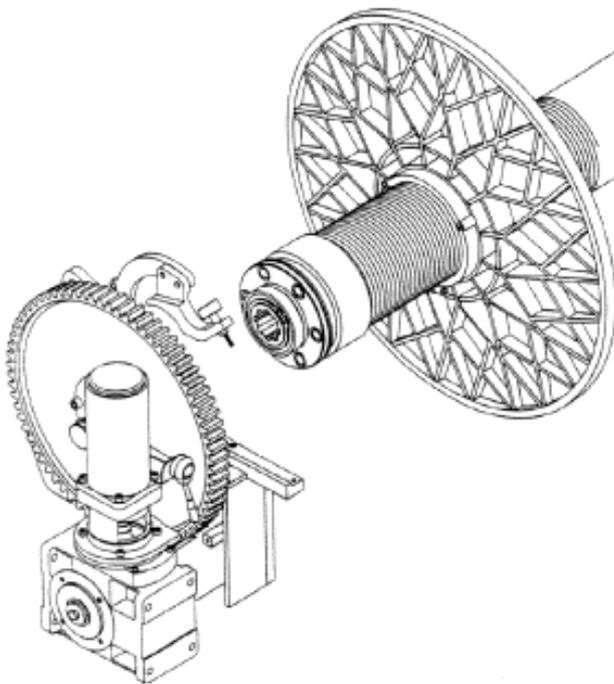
Quick beam change: this operation is facilitated by the quick insertion of the beam's end through grooved profile driven by an eccentric, while leaving the gear on board the weaving machine; the beam blocking is guaranteed by a quick gripping system
